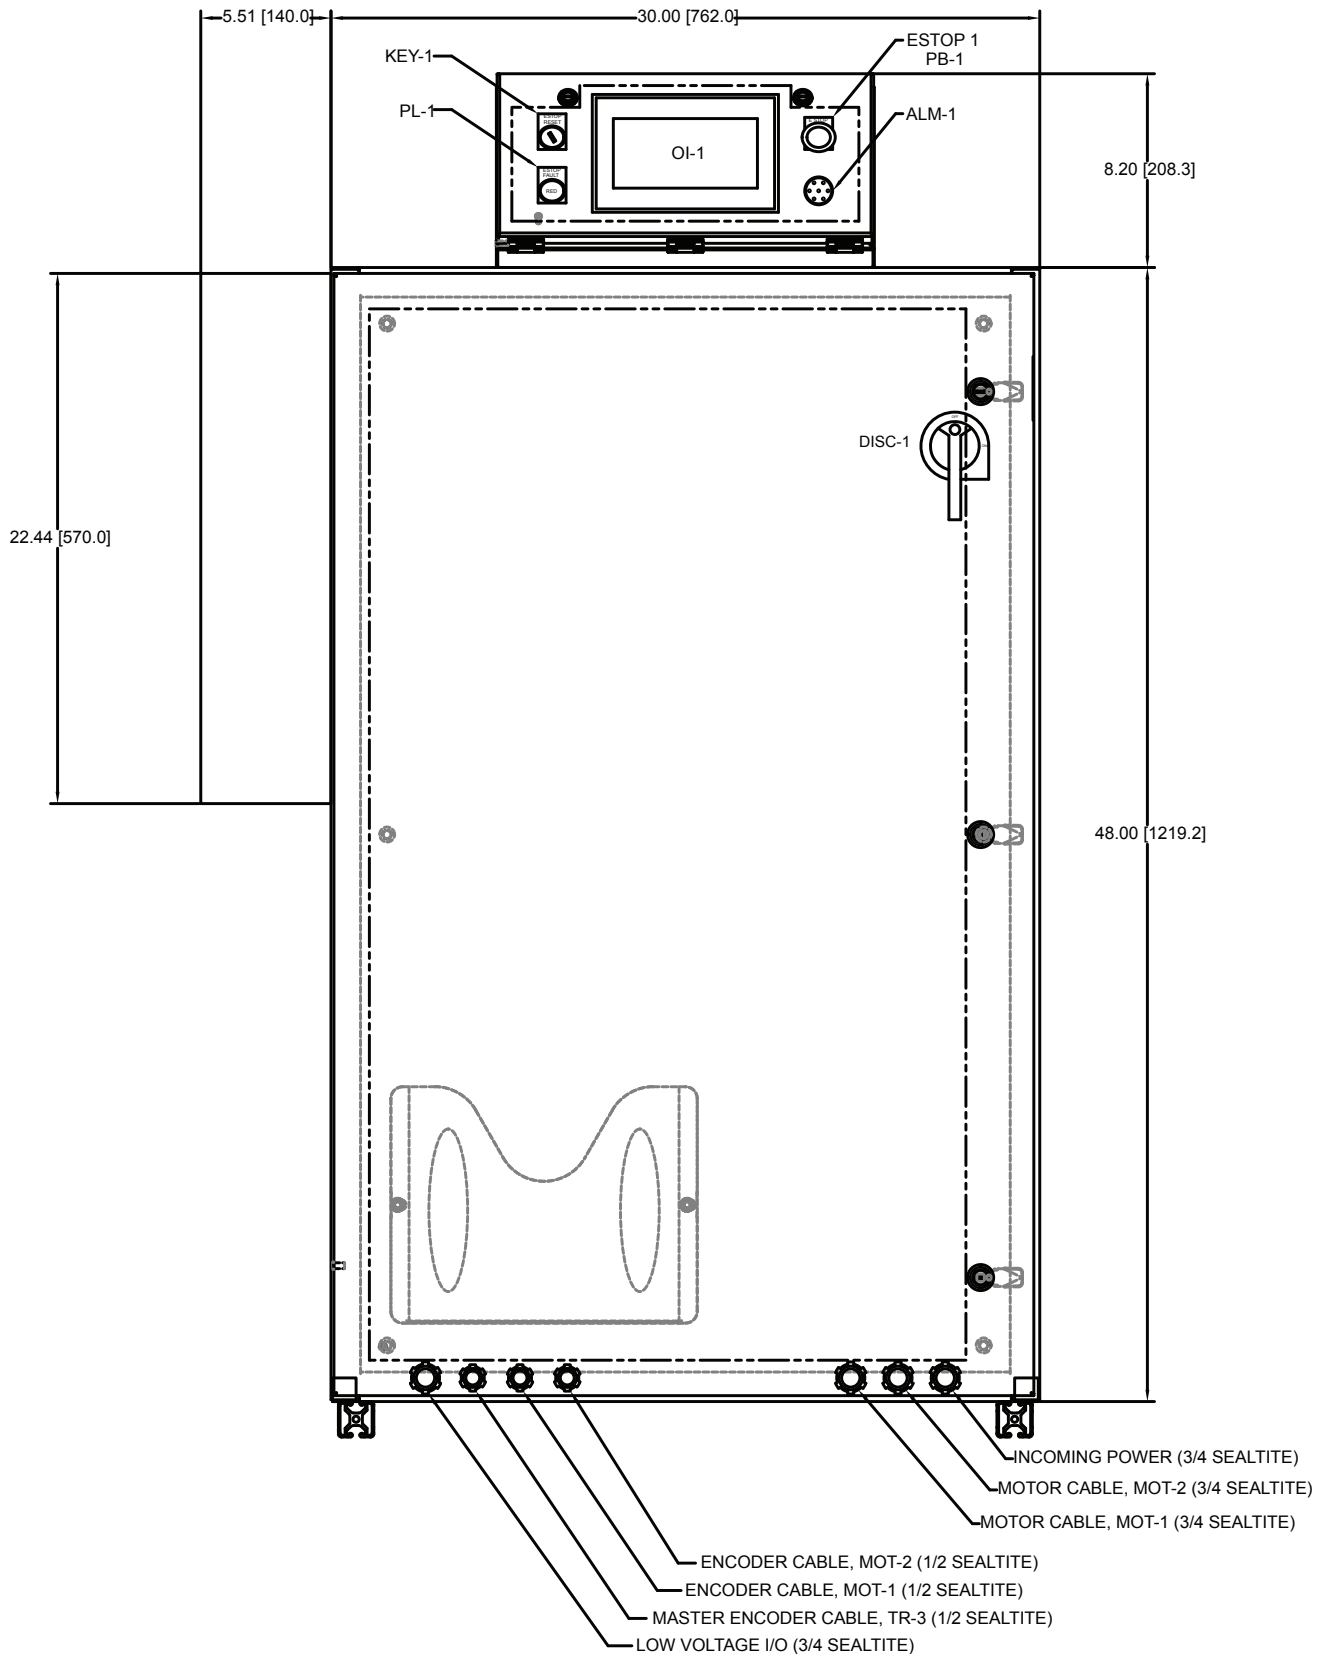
Cabinet dimensions and backside cable access ports. Cabinet depth is 16 inches
